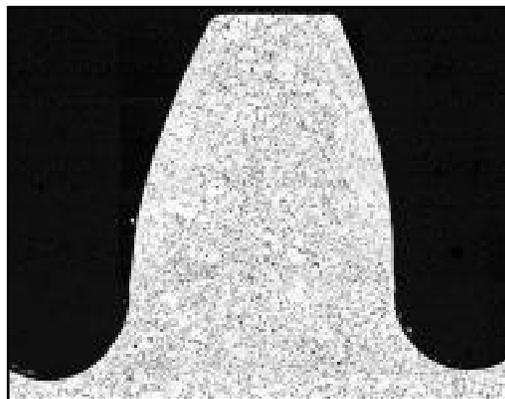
Photomicrograph of rolled densified helical gear tooth taken through crowned section.
